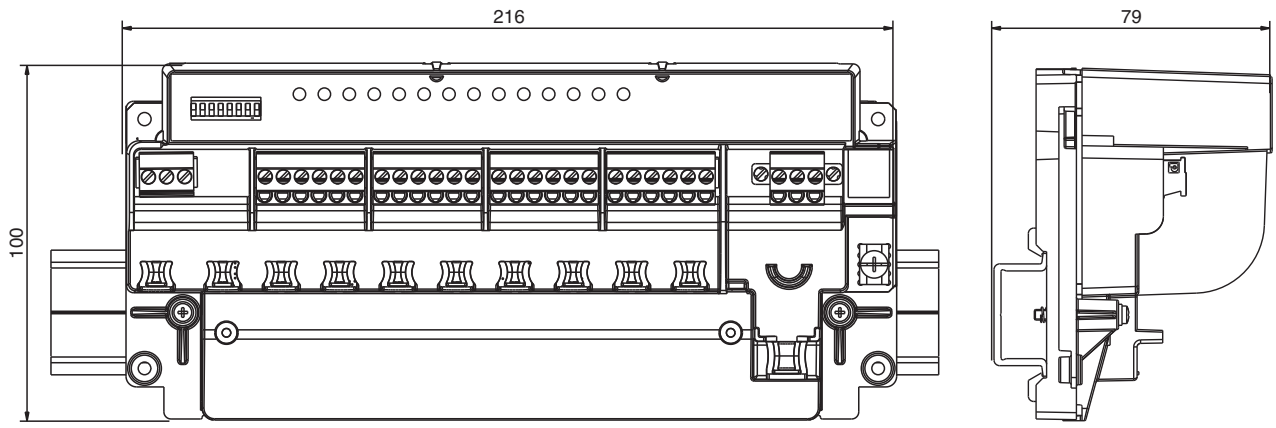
R8D0-MIO-Ex12.\* All dimensions in mm without tolerance indication.
